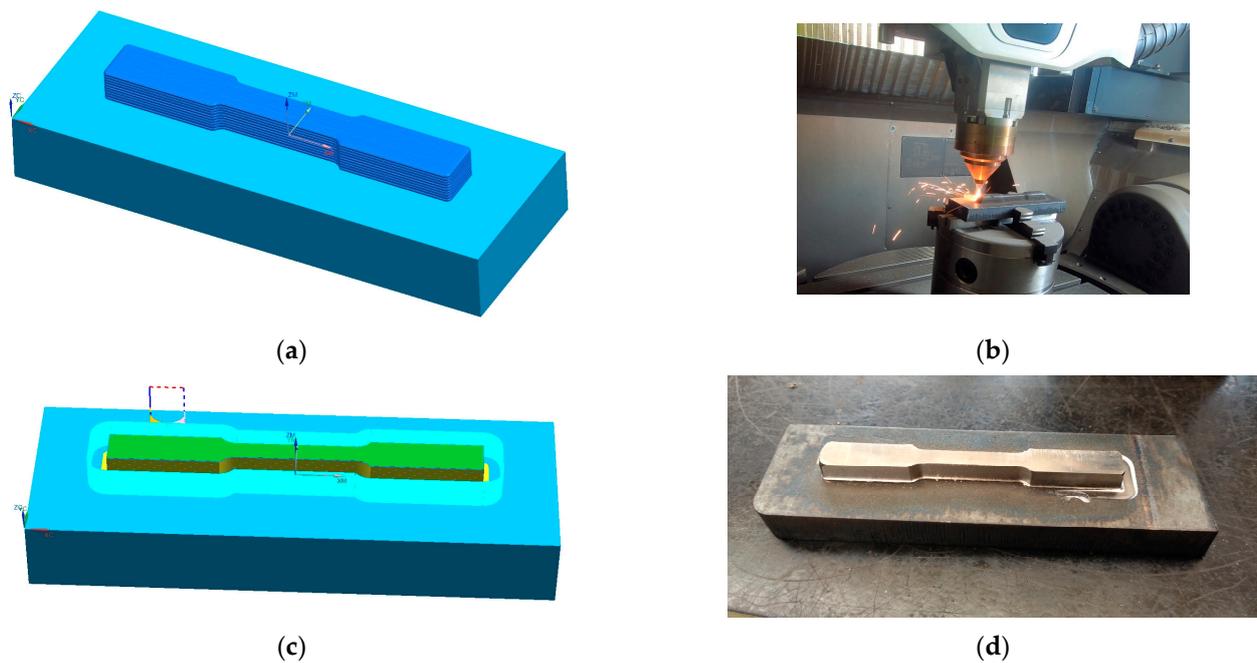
Specimen fabrication: (a) 3D model of the specimen stack; (b) specimen fabrication using DED; (c) specimen finishing process simulation using CNC milling; (d) specimen stack after finishing.
